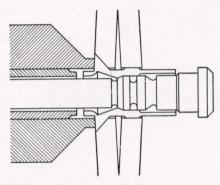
Gun pulls extruding angle and land of the pin through the sleeve, positively expanding sleeve to fill rivet hole.
